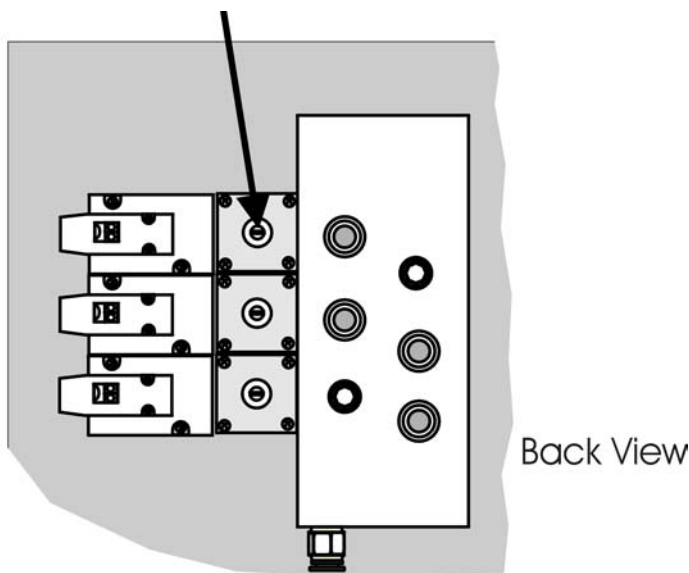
Air Pressure adjustment screws (Located behind back cover)
